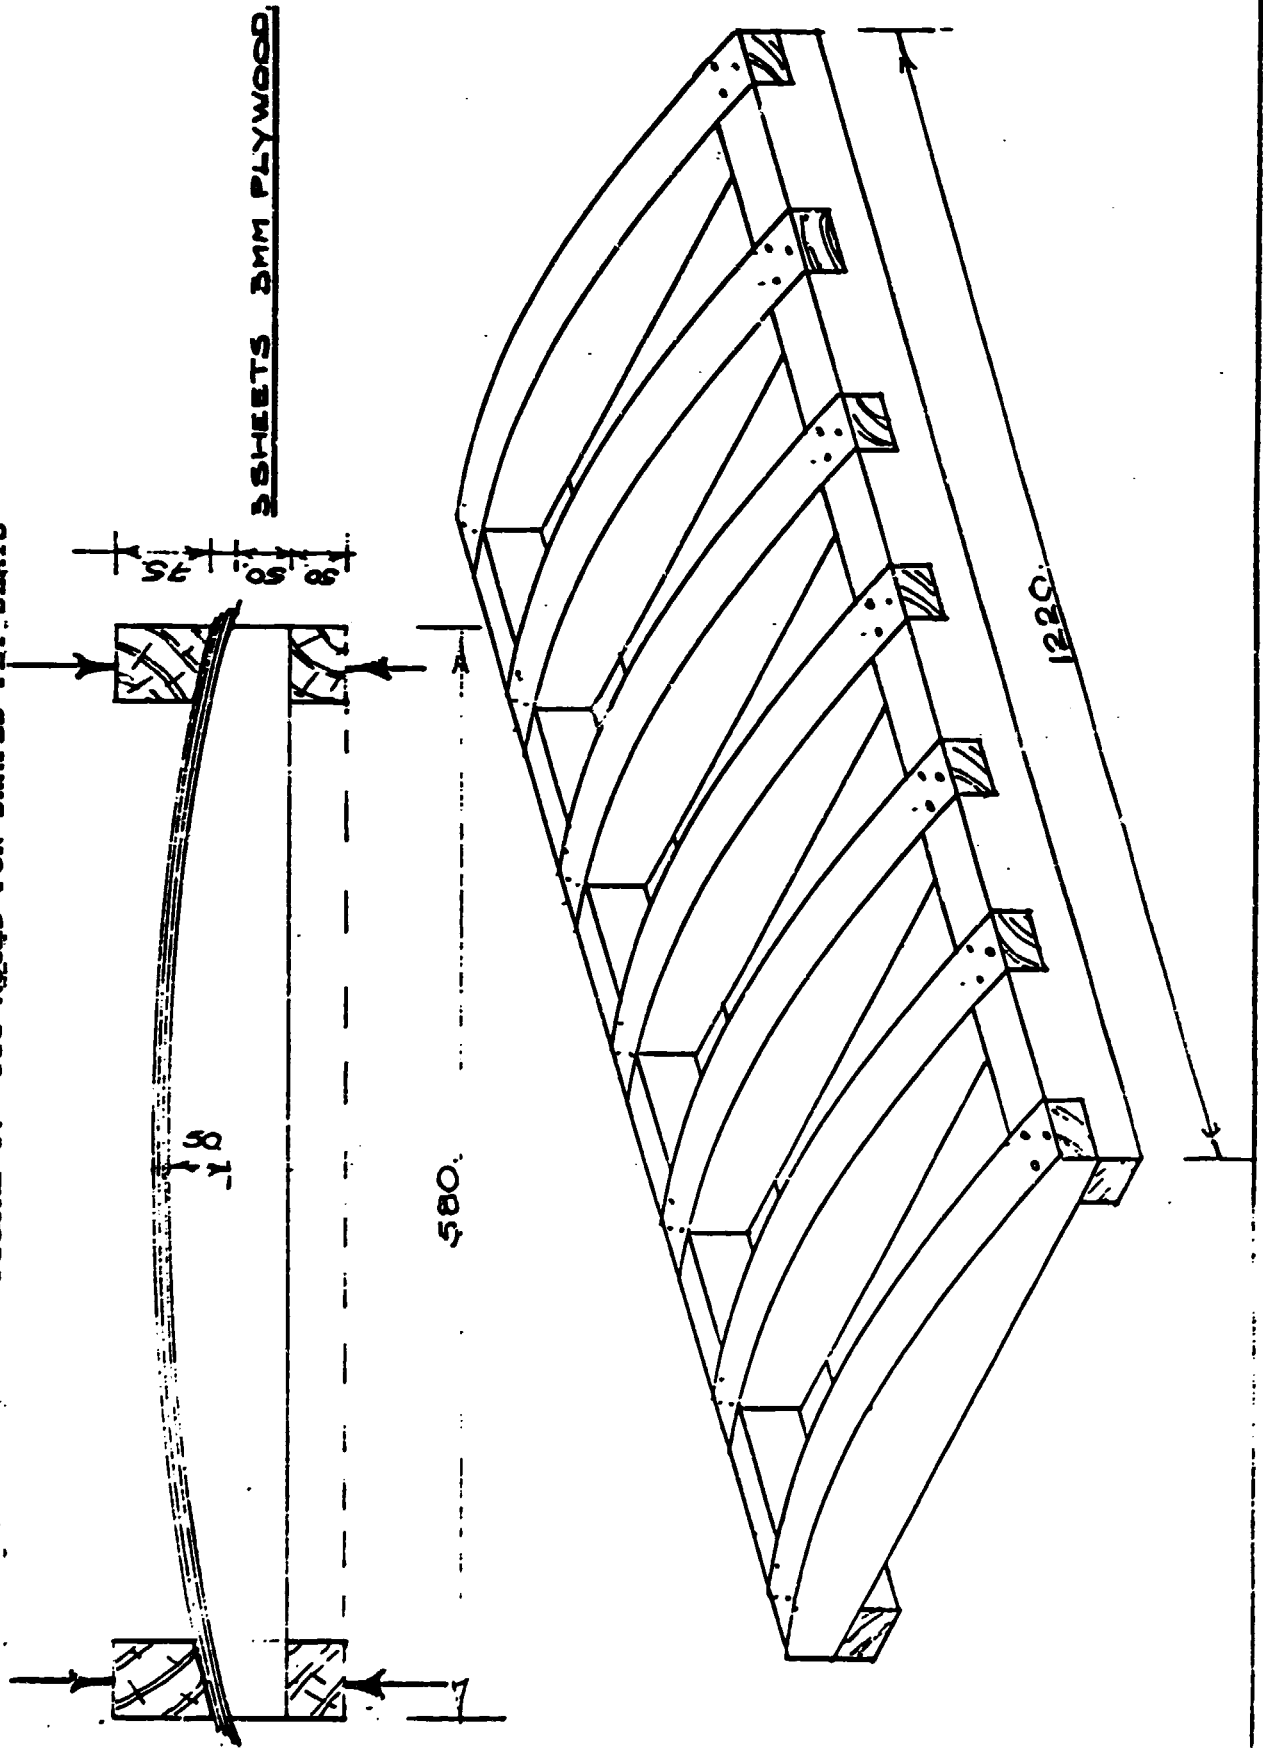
JIG MOULD FOR COMPLEX SHAPED PLY SEATS
